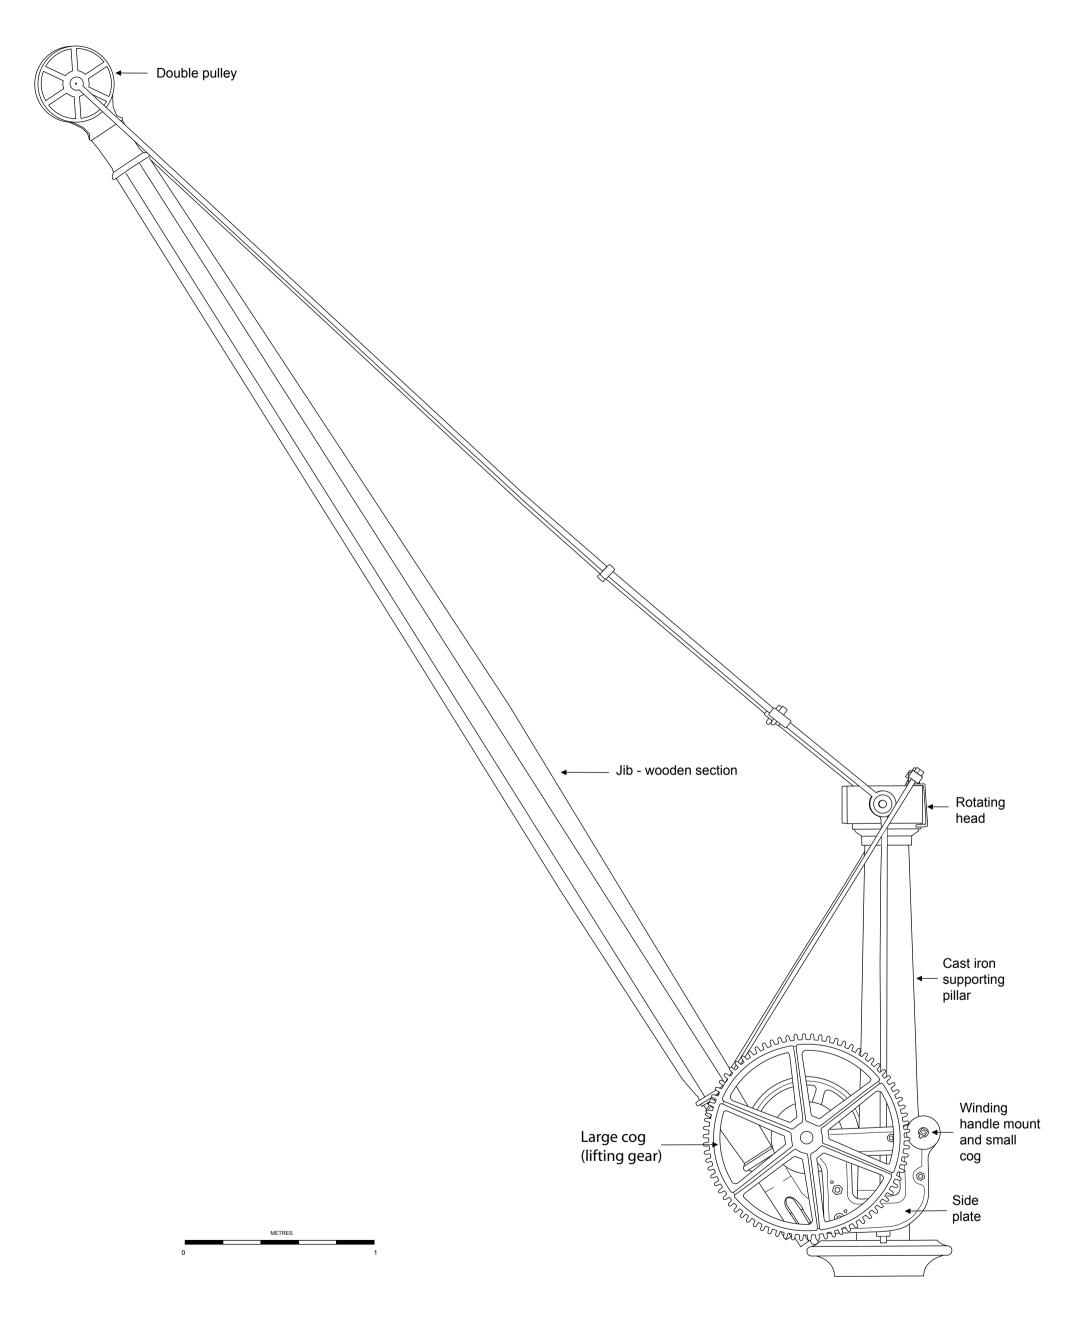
Site 3(13) Crane (Llechwedd exchange sidings) left elevation
